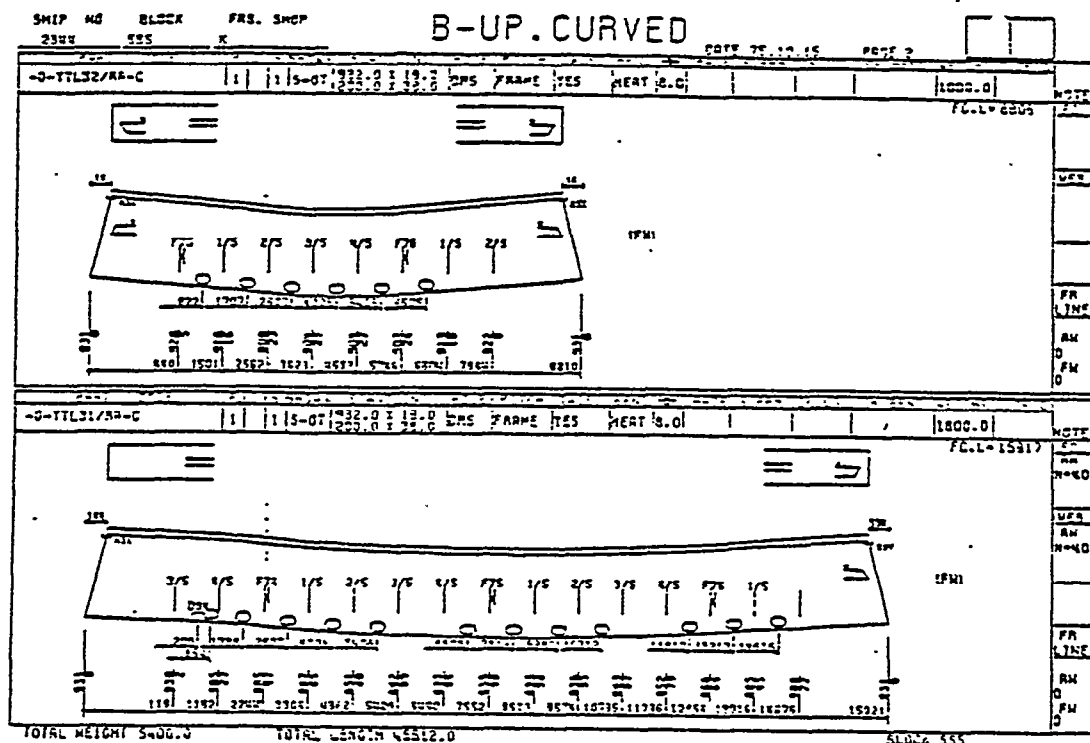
Parr Dimension Plan of Cut-out Frame [by Dot-printer]
